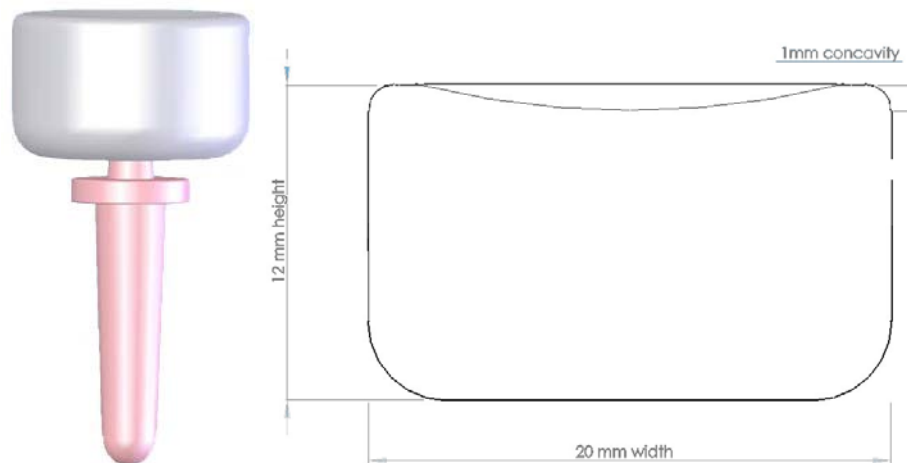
Tornier RHS stem and attached head (left) and isometric view of head with dimensions (right)
